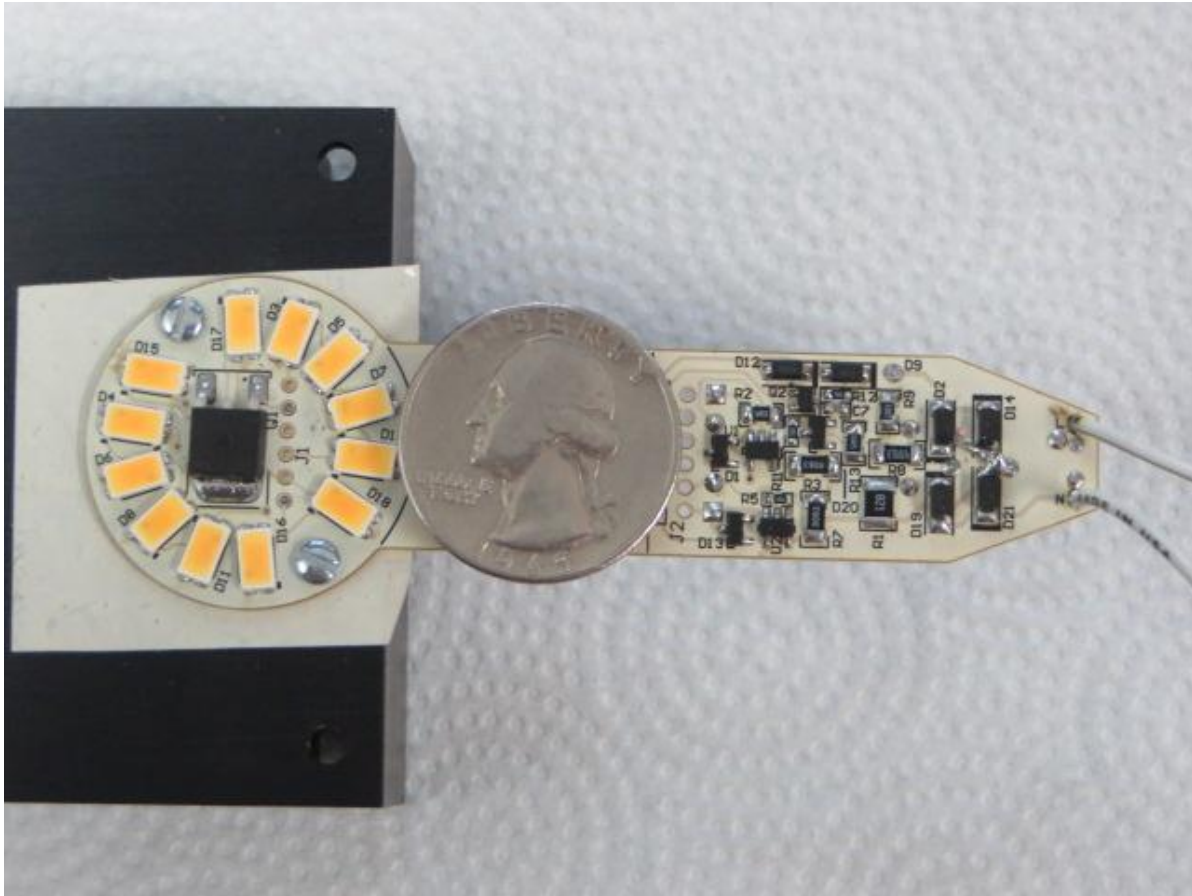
PCB section where quarter is at is removed when installed in candelabra, J2 solders to J1 with a right angle connector, all hot components on round board that is connected to heatsink
